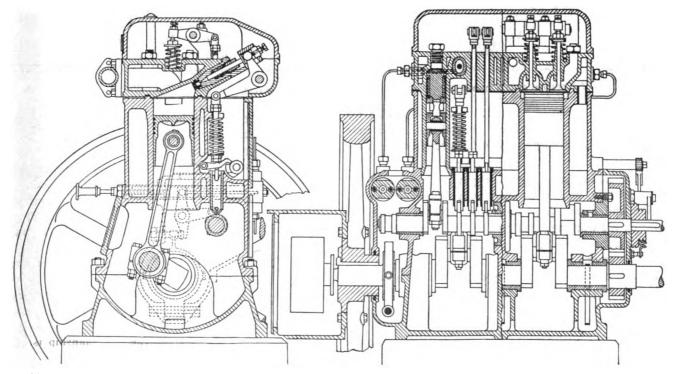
Sections through the Hindi Diese'-type engine which has been produced in motor vehicle sizes and weights. Note compressor cylinders mounted parallel to main cylinders.
